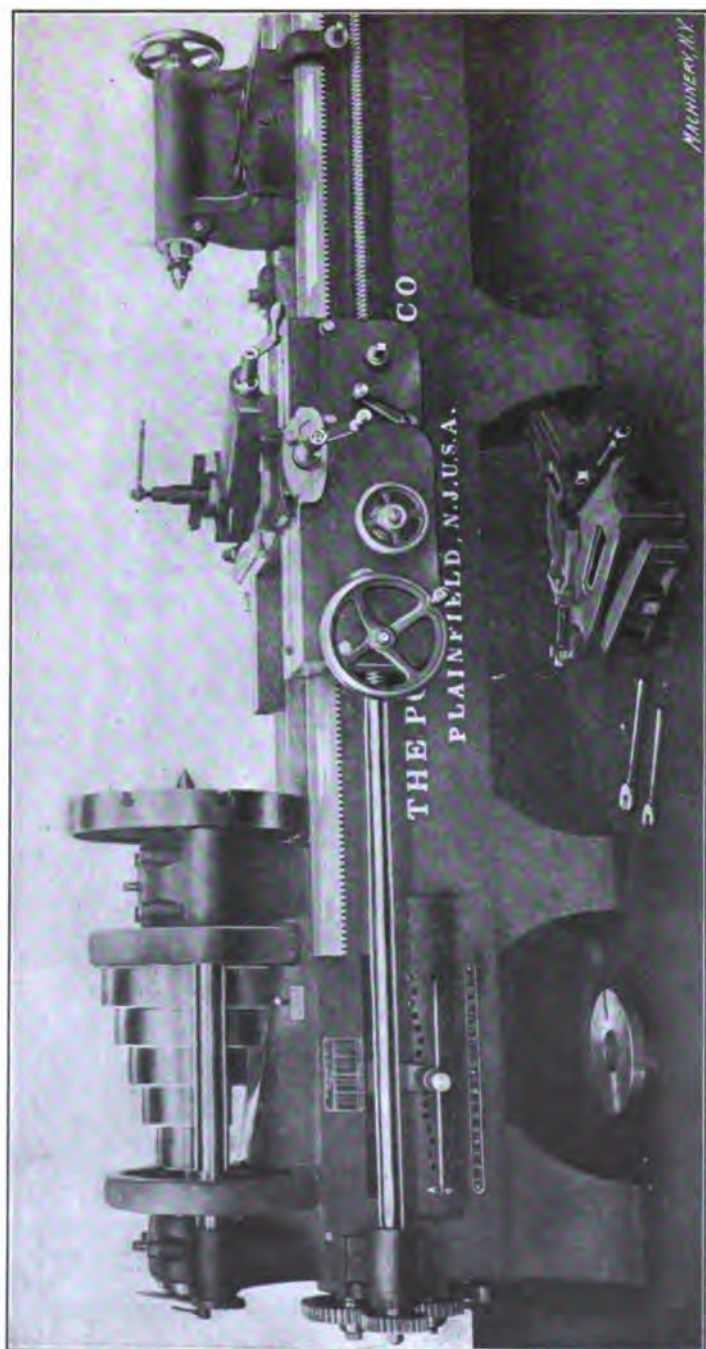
Twenty-four-inch Engine Lathe with Quick-change Gear Device
